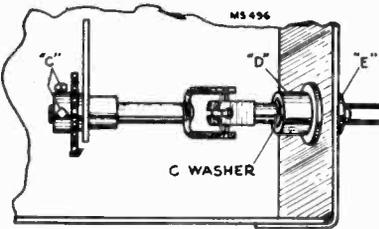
The late production range switch coupling shaft of the RCA 612V series.
